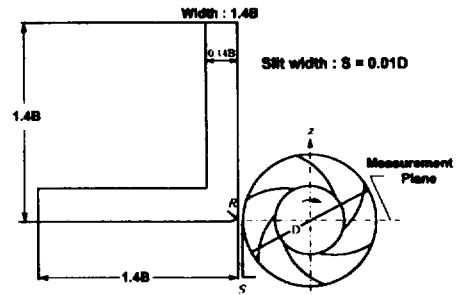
Dimensions of the impeller and wedge⁽⁸⁾
